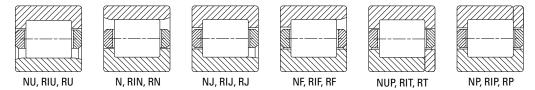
Standard cylindrical roller bearing styles metric/inch.
